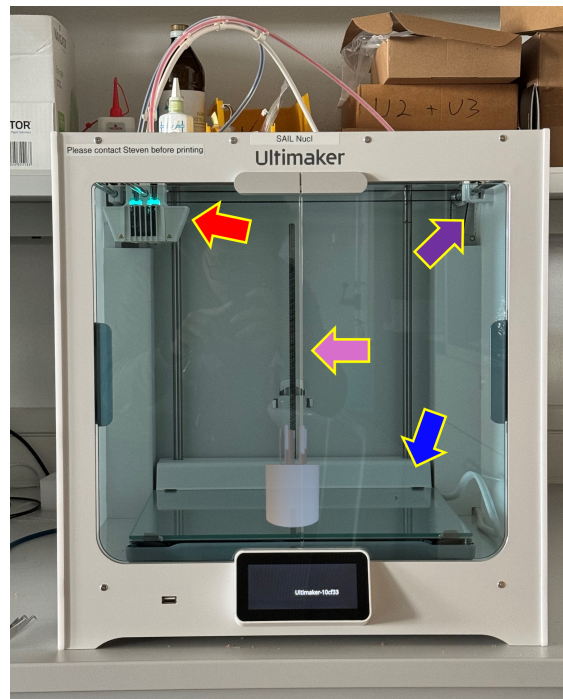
An FDM 3D printer, Ultimaker S5, showing the printer bed (blue), the nozzle head (red), the XY-axis for moving the print head (purple), and the Z-axis for lifting the print bed towards the nozzle head.
